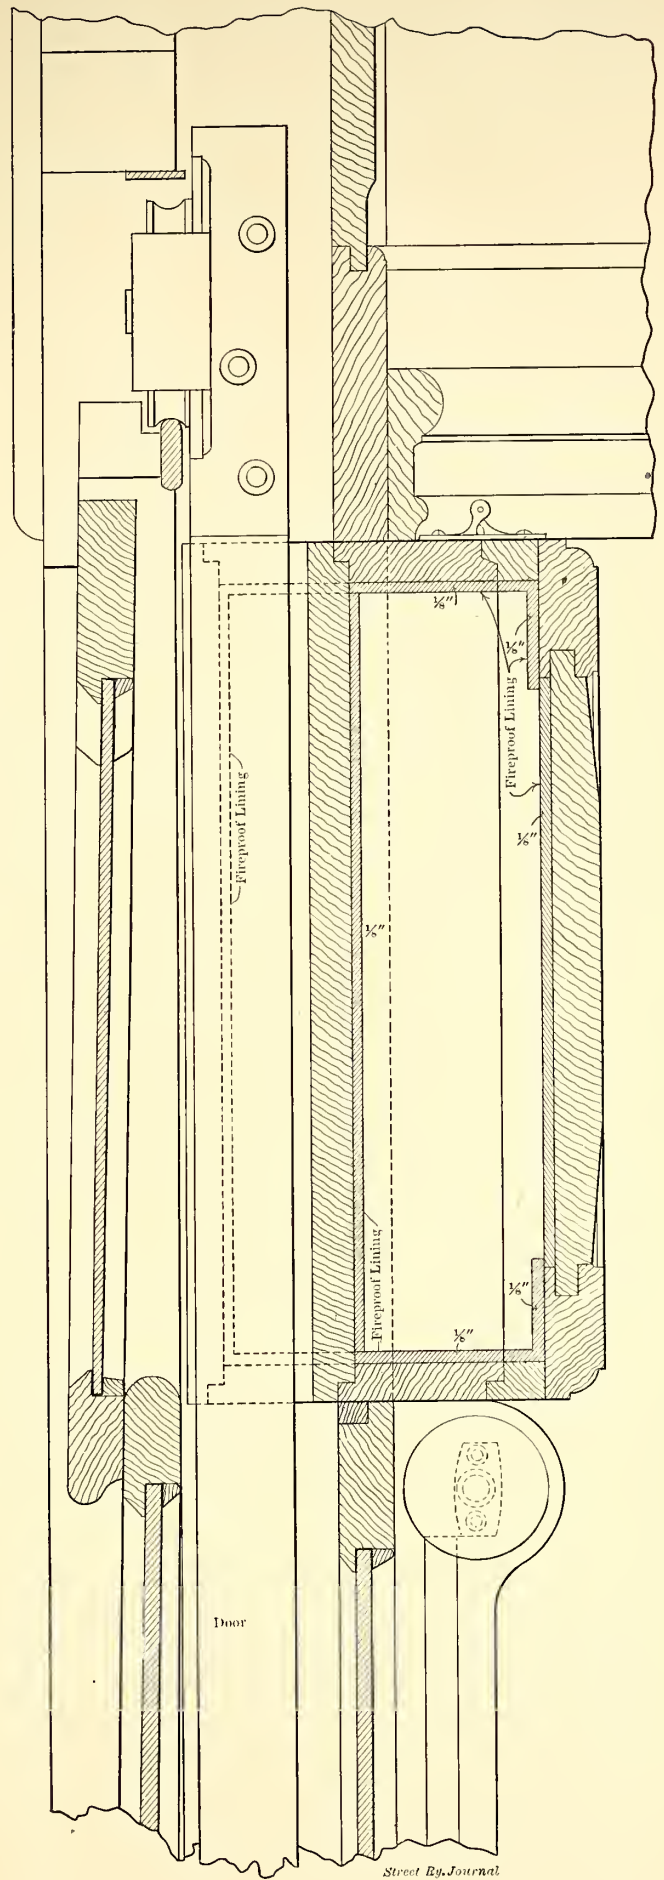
SECTION SHOWING LOCATION OF SWITCH CABINET, WIRING SCHEME FOR WASHINGTON CAR
